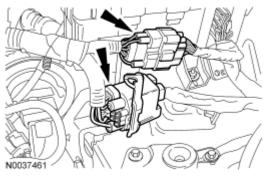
Locating Engine Wiring Harness Electrical Connectors Courtesy of FORD MOTOR CO.
